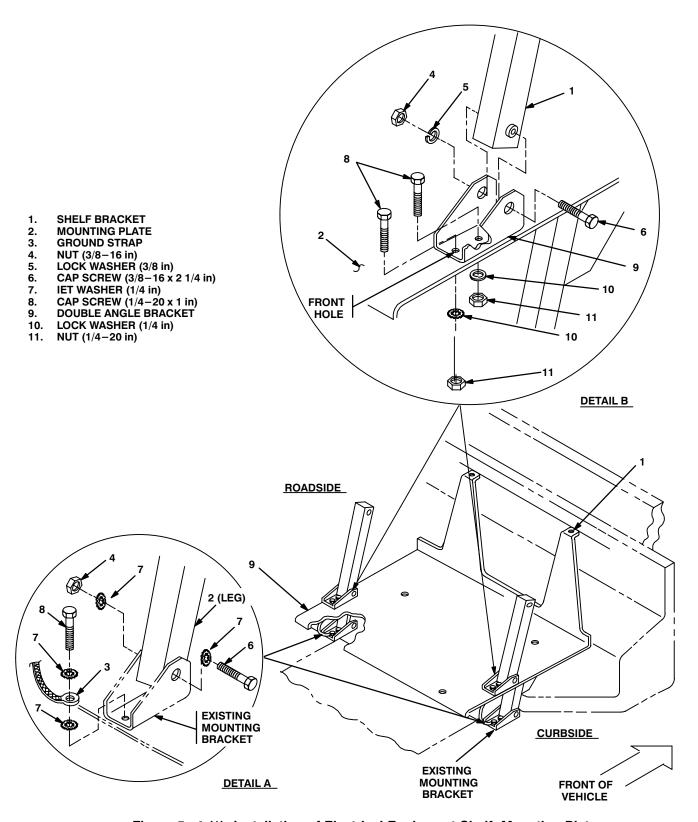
(1). Installation of Electrical Equipment Shelf: Mounting Plate
